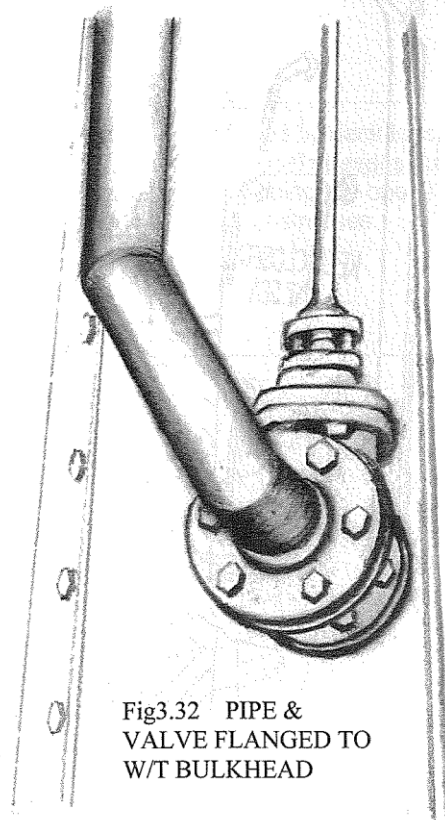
PIPE & VALVE FLANGED TO W/T BULKHEAD
